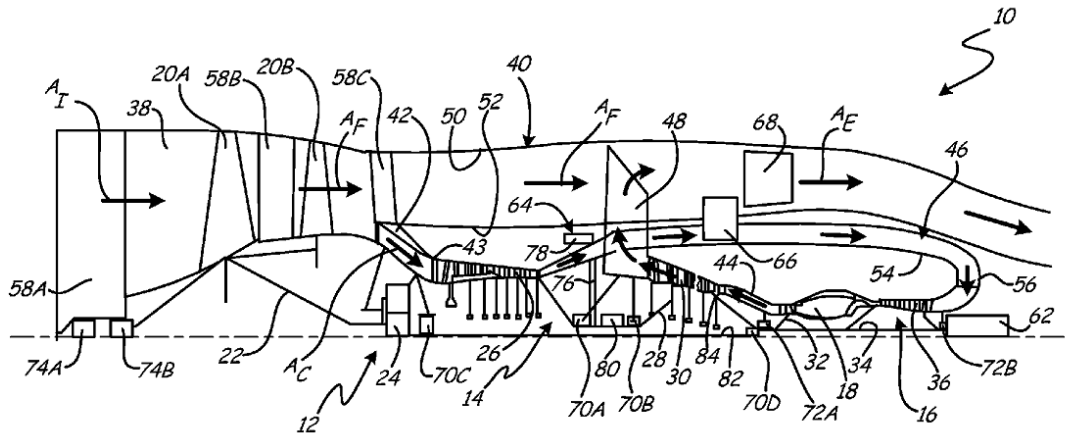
Reverse-flow core, geared, intercooled engine patent illustration (2-spool case) [16]
